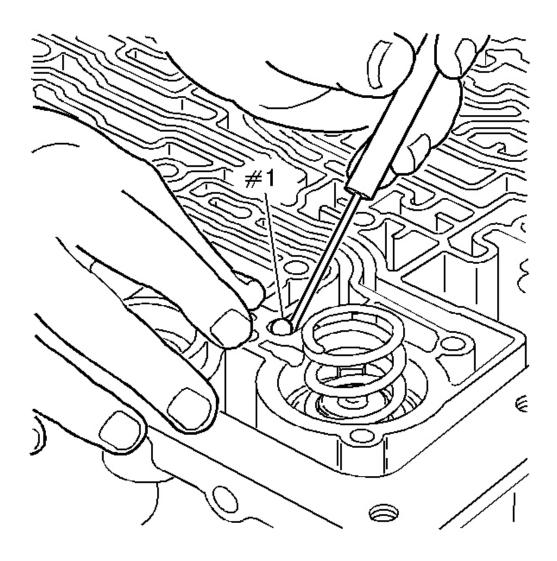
Locating #1 Checkball Courtesy of GENERAL MOTORS CORP.
